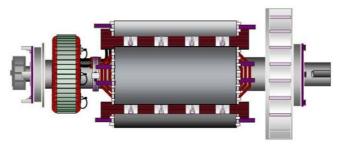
TWO BEARING ALTERNATOR ROTOR SHOWING SHAFT WITH KEYWAY FOR FLEXIBLE COUPLING (AT RIGHT)
